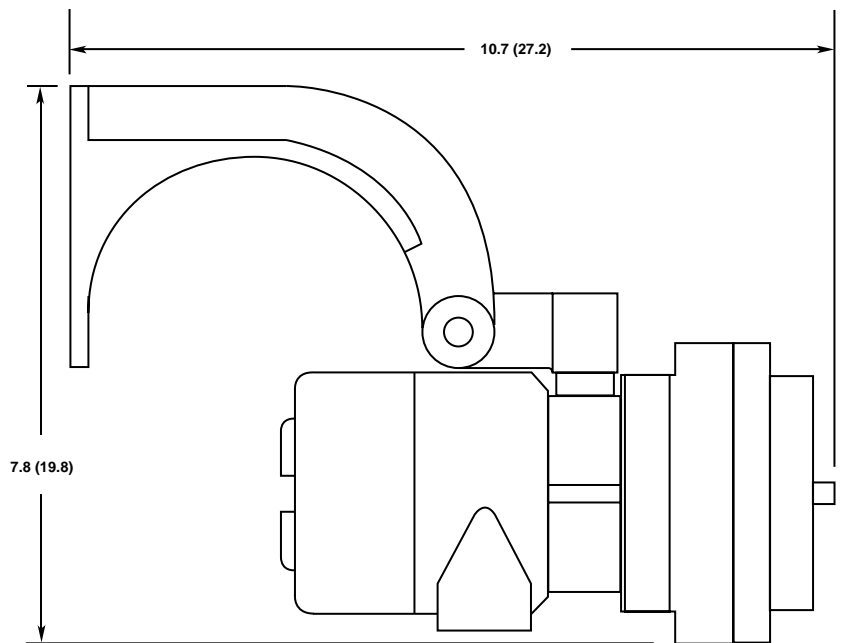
B—Dimensions of X3300 with Q9033 Mounting Bracket in Inches (cm)
